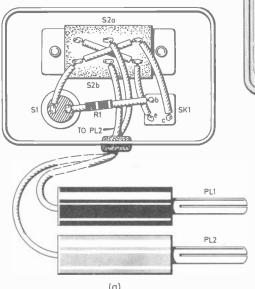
(a) Component layout and wiring for the ohmmeter version.
